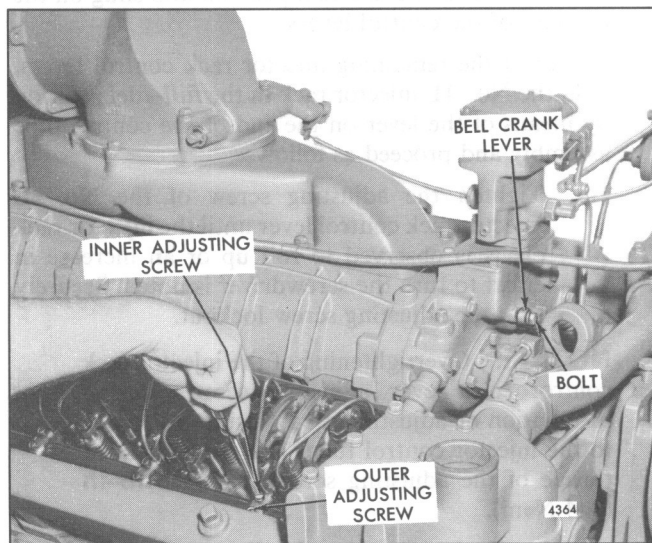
Positioning No. 1R Injector Rack Control Lever
